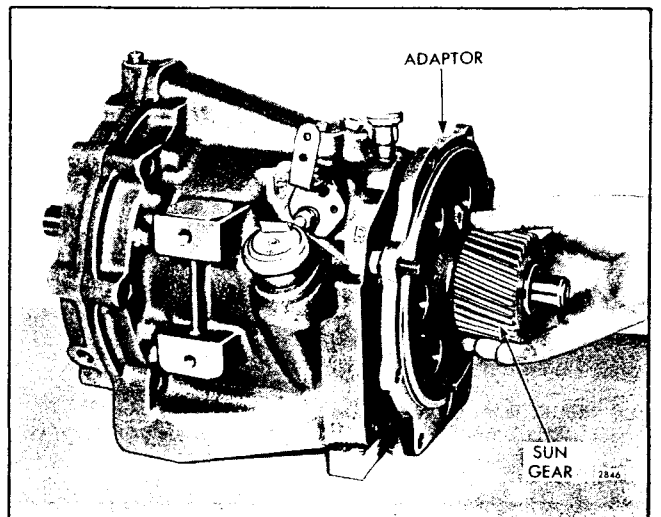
Removing or Installing Reduction Gear Adaptor and Sun Gear Assembly from/to Reverse Gear Housing (2.1:1 Ratio)
